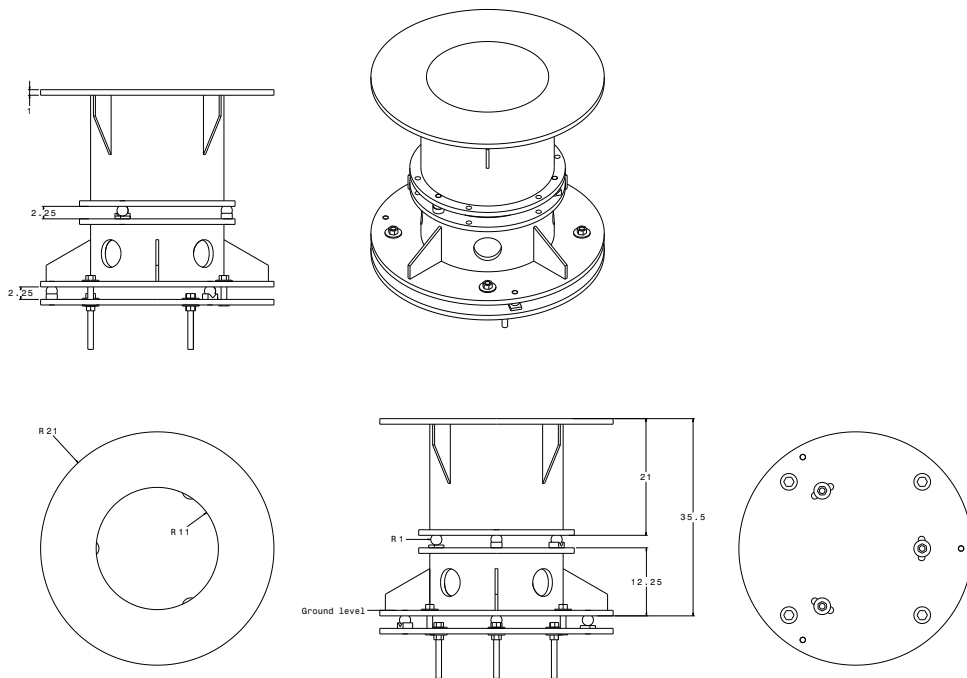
Dimensions of the combined pier. The upper and lower sections are connected by 2 inch kinematic mounts. The lower pier has holes in the sidewall to allow access for cable pass-throughs from the azimuth axis of the telescope. The bottom of the lower pier also has kinematic mounts to connect to the acceptor plate (lower right) which lies below ground level and connects to the concrete pier. All dimensions are in inches.
